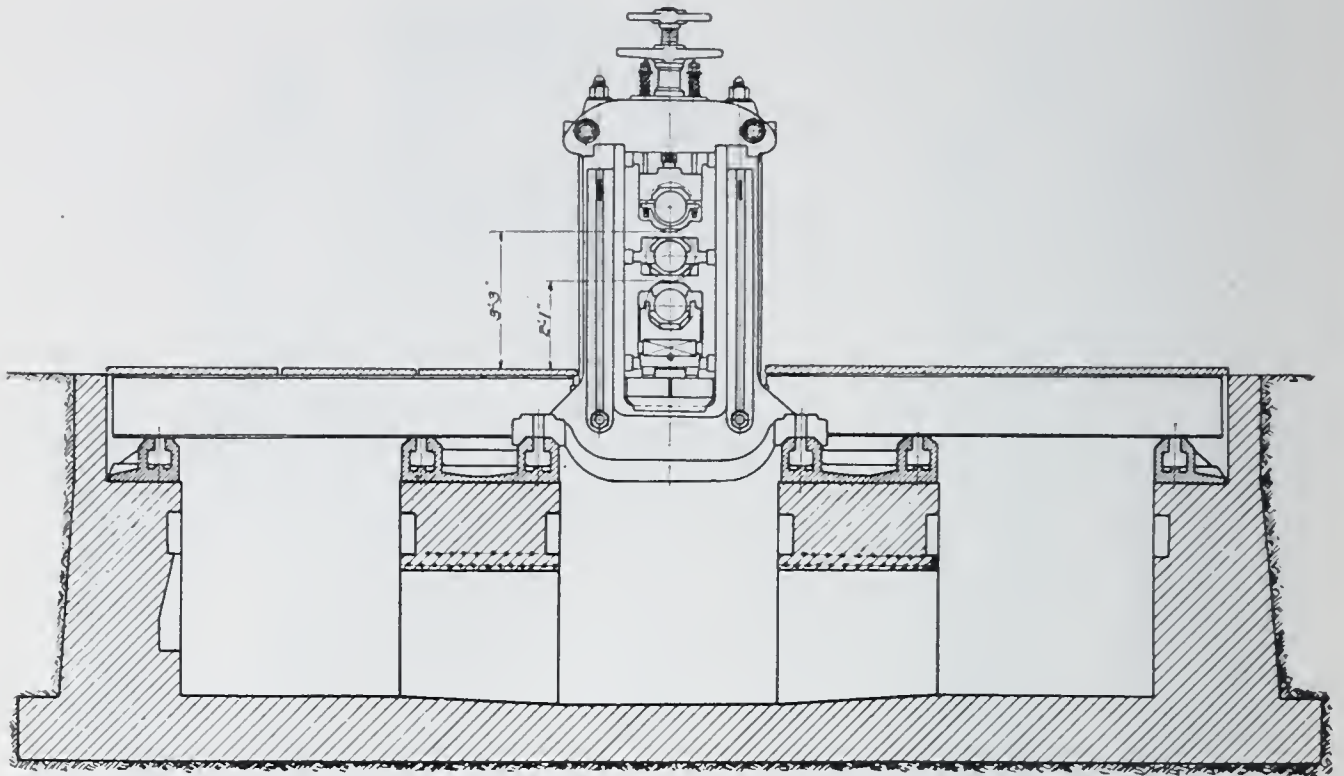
Side Elevation of 14-Inch, Open-Top, Roll Housing.
